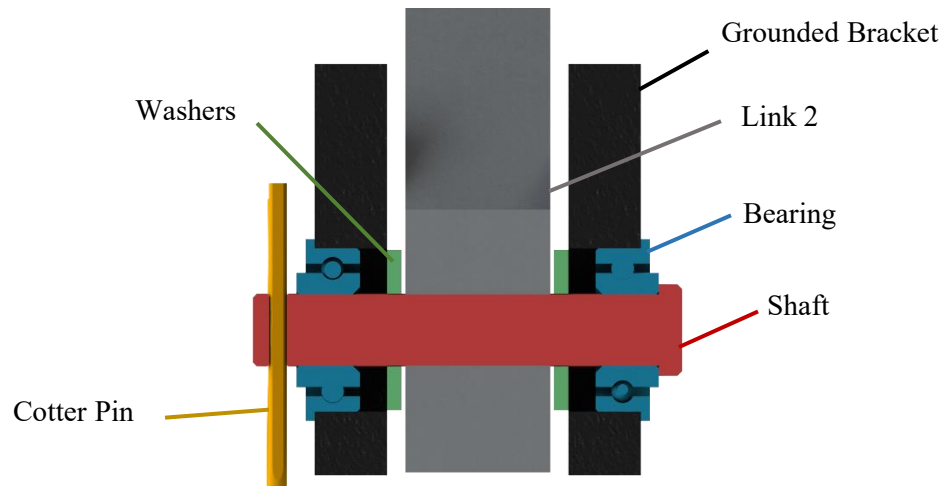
The first iteration of the pivot bearing assembly. The gap between the cotter pin and the left bearing introduced side-to-side backlash in Link 2.
